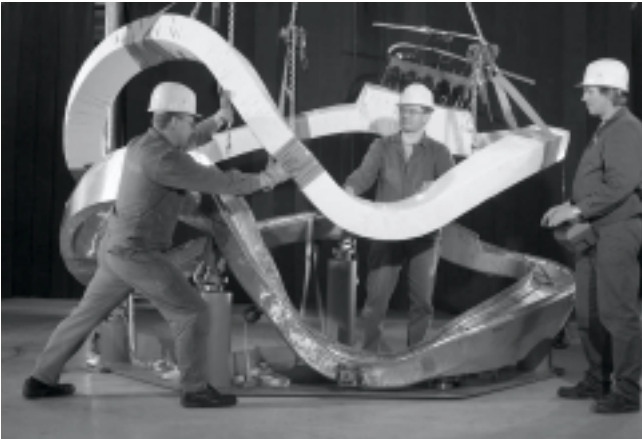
Non-planar winding package and lower half of the casing (by courtesy of BNN)
